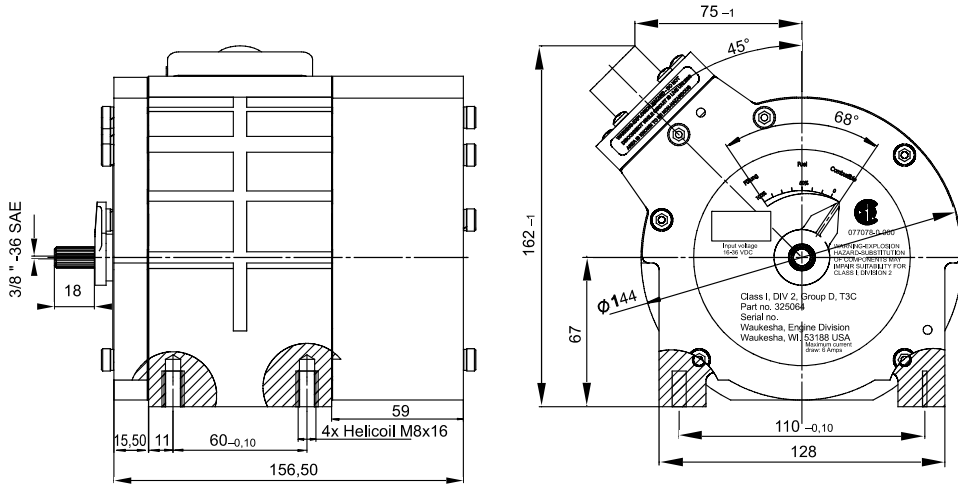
Dimensional drawing StG 2040.XX-SV-PD
